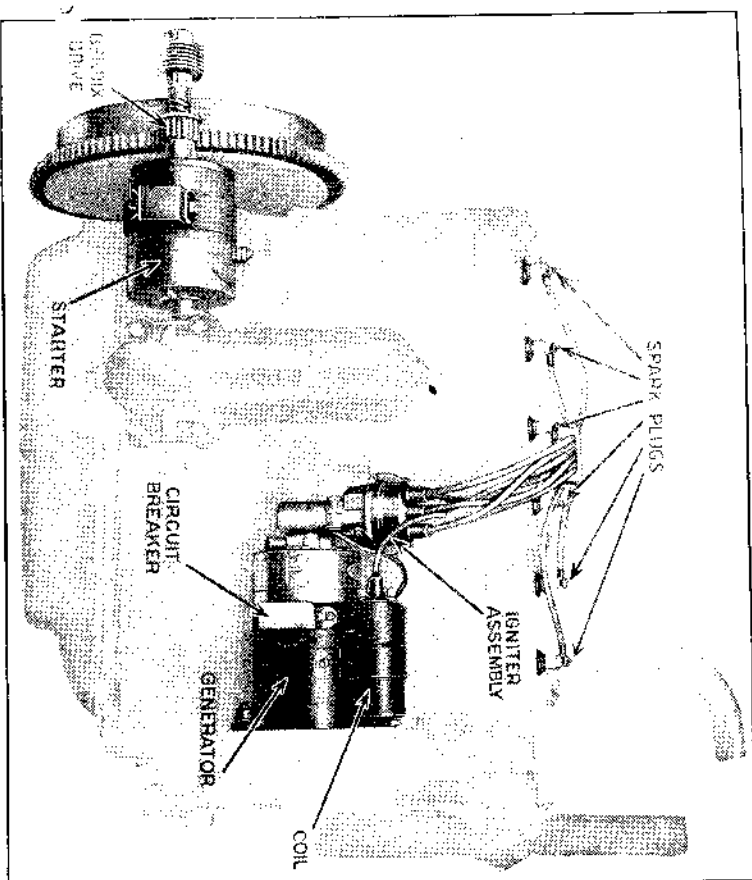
Right Side of Engine, Showing Electrical Equipment
